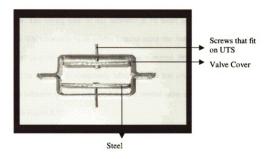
Picture showing the cut section of valve cover and the testing fixtures
